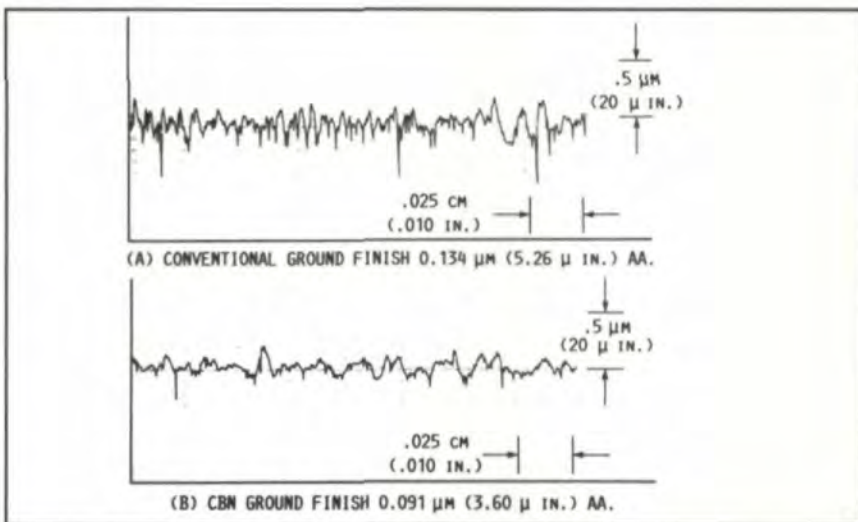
Surface Finish Measurement in Profile Direction With .010 Cutoff.
